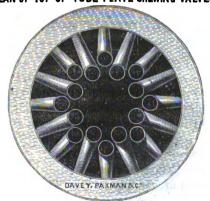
Davey-Paxman boiler. ertical boiler having given a r
